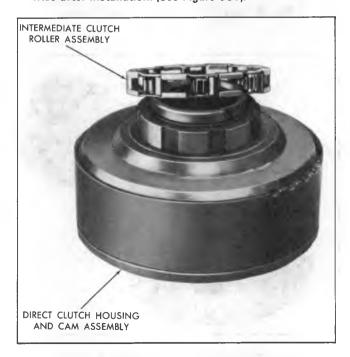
T--Installing Intermediate Clutch Roller Assembly
